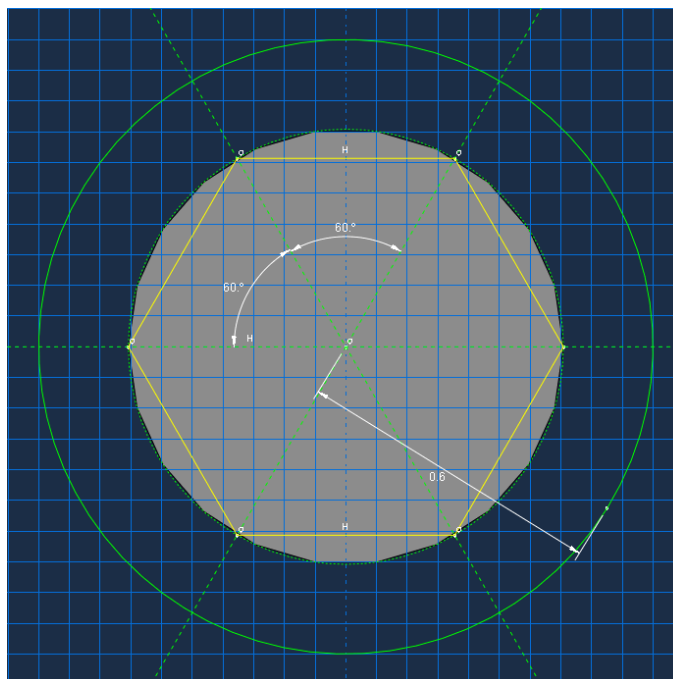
Sketch for the profile that will be cut extruded into the bolt head to give it a hexagonal shape.
